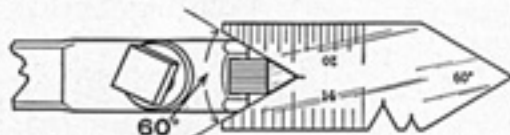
Center gage used for checking angle of cutter bit ground for cutting screw threads.
